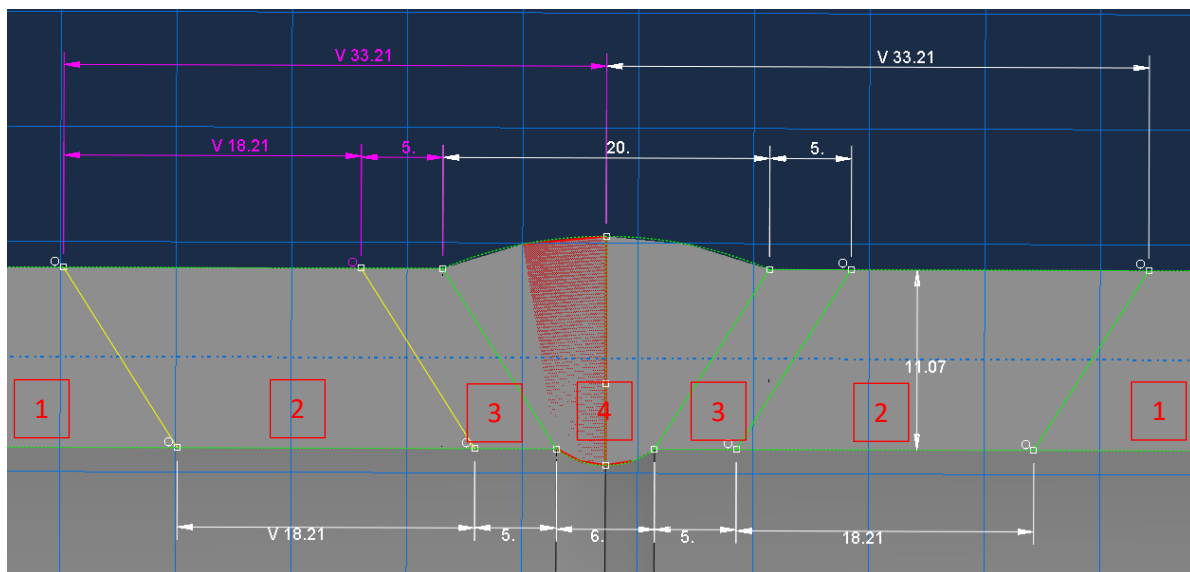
Design of the welded connection of the pipe. 1): unaffected base material, 2): PWHT base material, 3): HAZ, 4): Melted zone (Weld metal from electrode).
